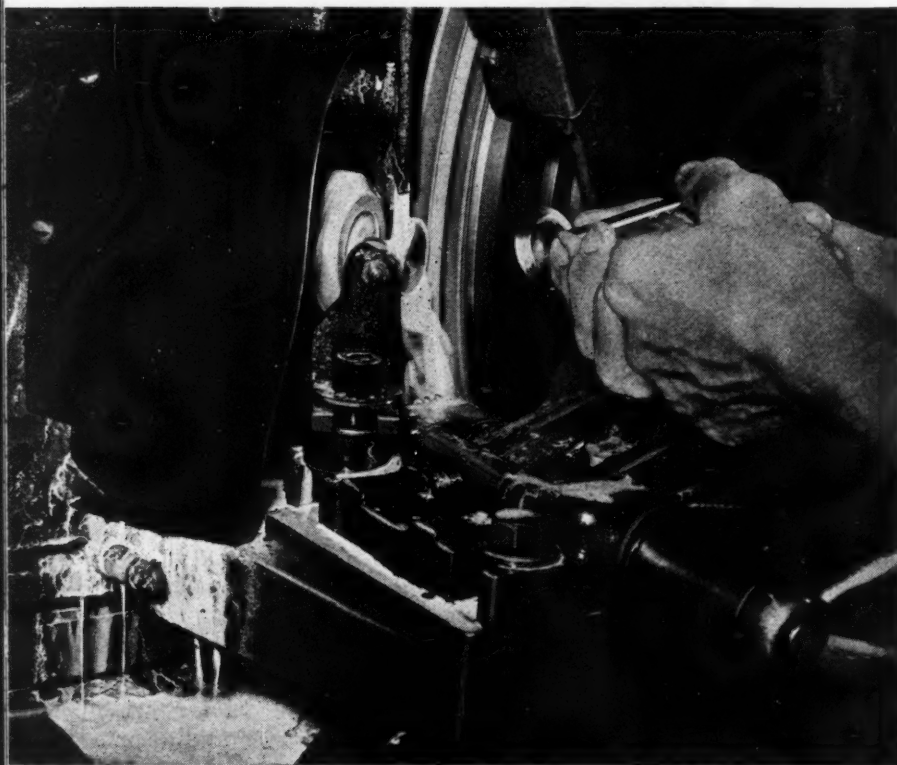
A Conical, Smooth Valve Seat, Concentric with the Valve Stem, is Ground in This Operation, Using a Grinding Wheel that is Dressed to a 60-degree Angle
